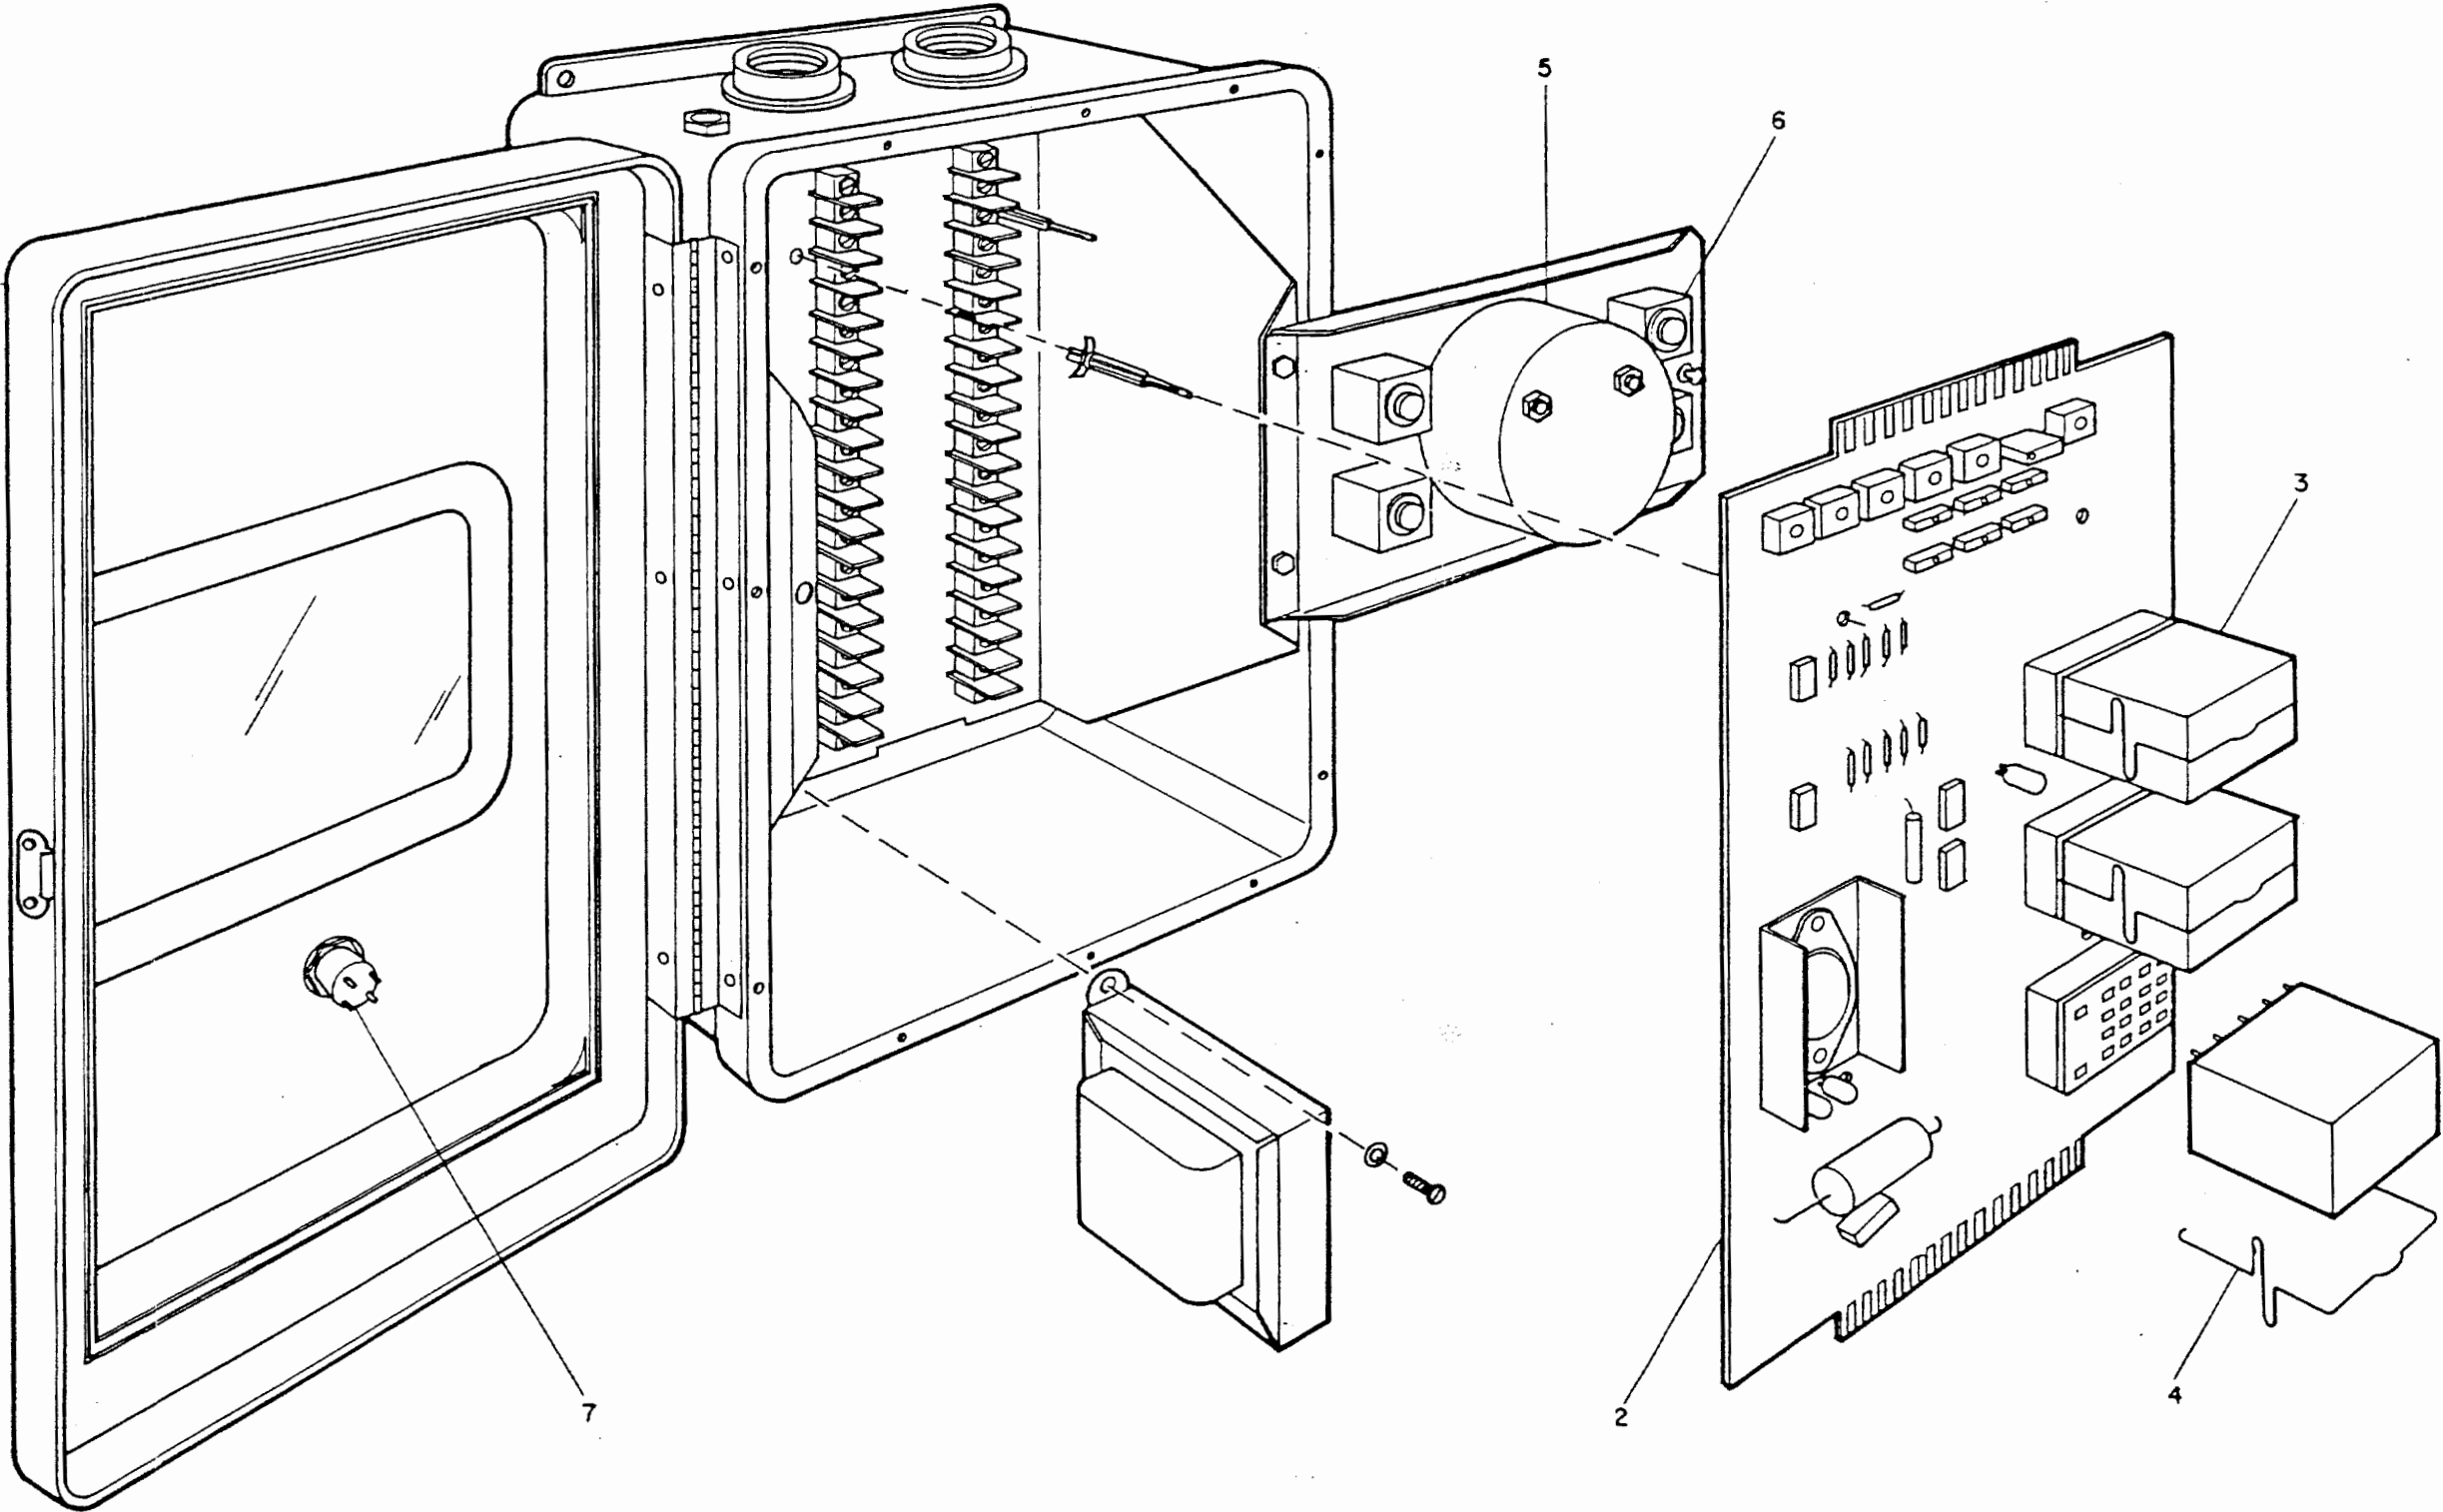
CD800W Gas Detector System Circuit Board Assembly
